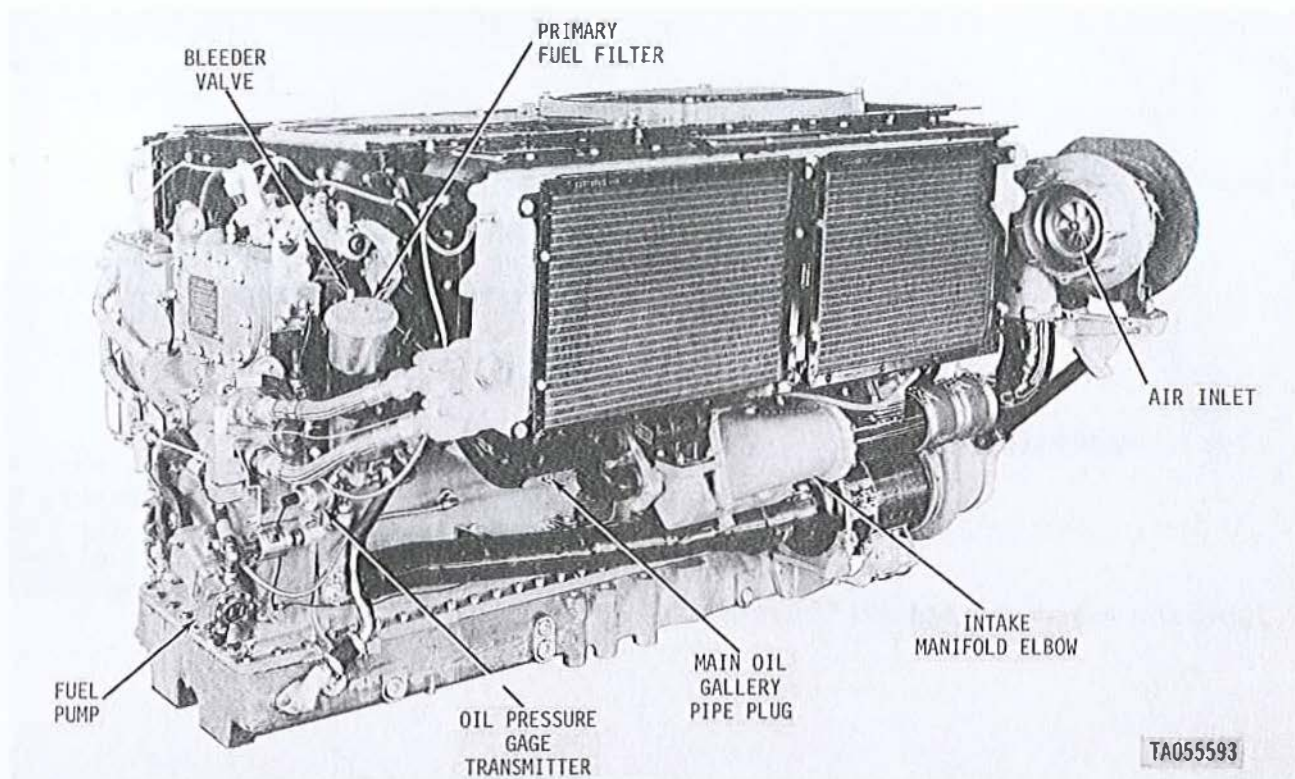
Engine connection points—right front view, model AVDS-1790-2DR engine.
